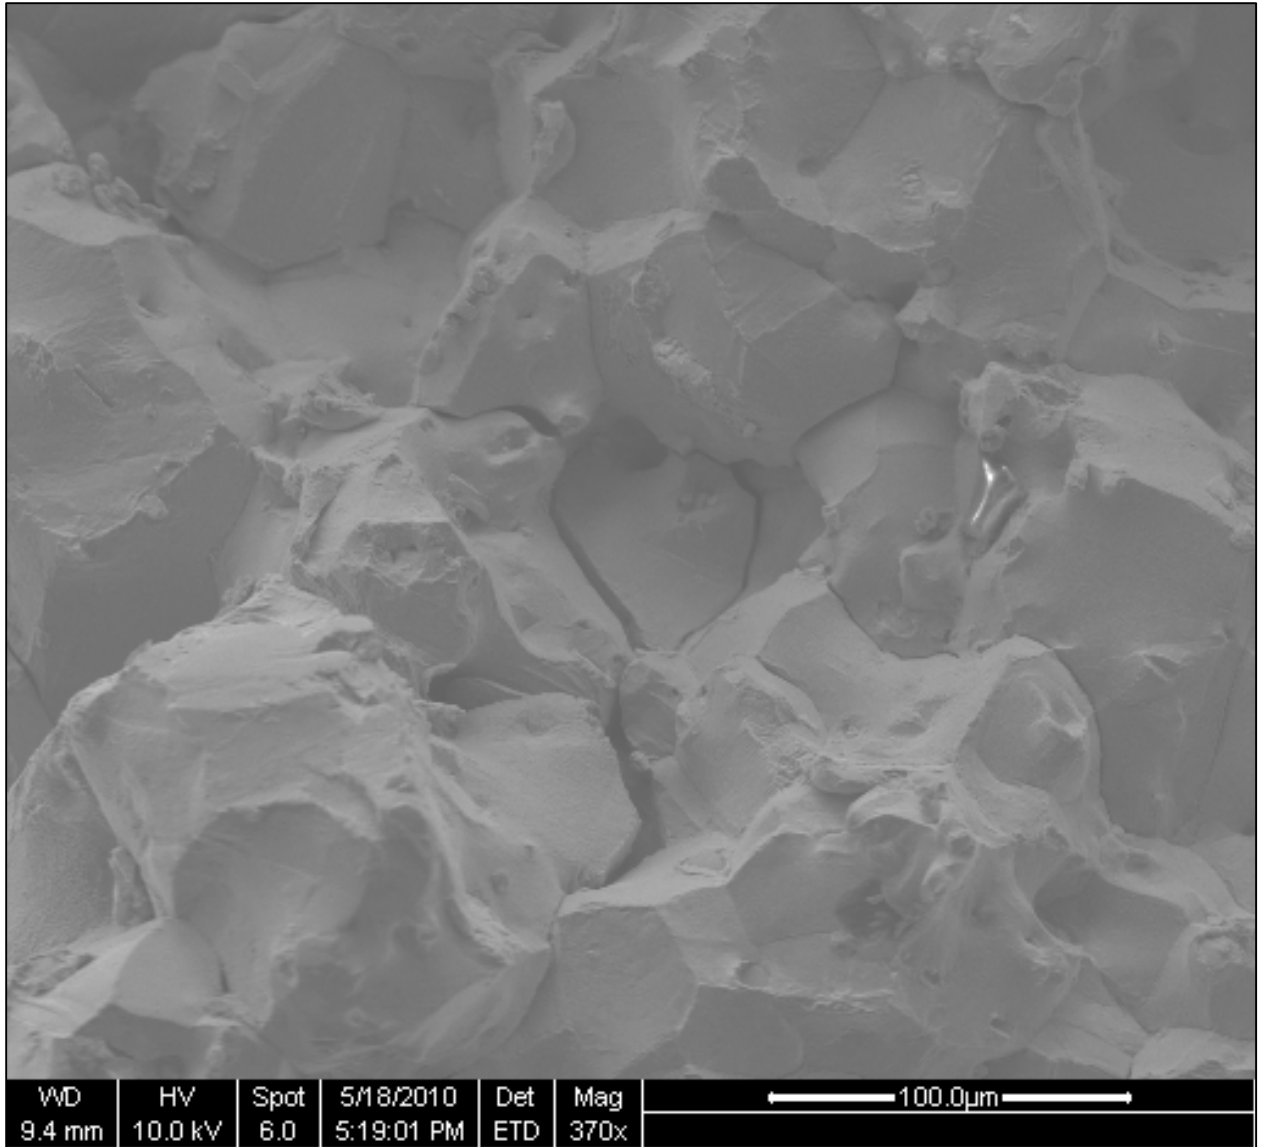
Haynes 230 on-cooling 2202°F fracture surface. Secondary cracks are quite clear, and grain boundary surfaces are largely undeformed.
